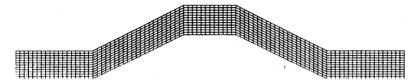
The first step in making a Matrix Transformer Module is to stamp out come copper blanks, about 0.010" thick and 0.20" wide. They should be annealed dead soft.
